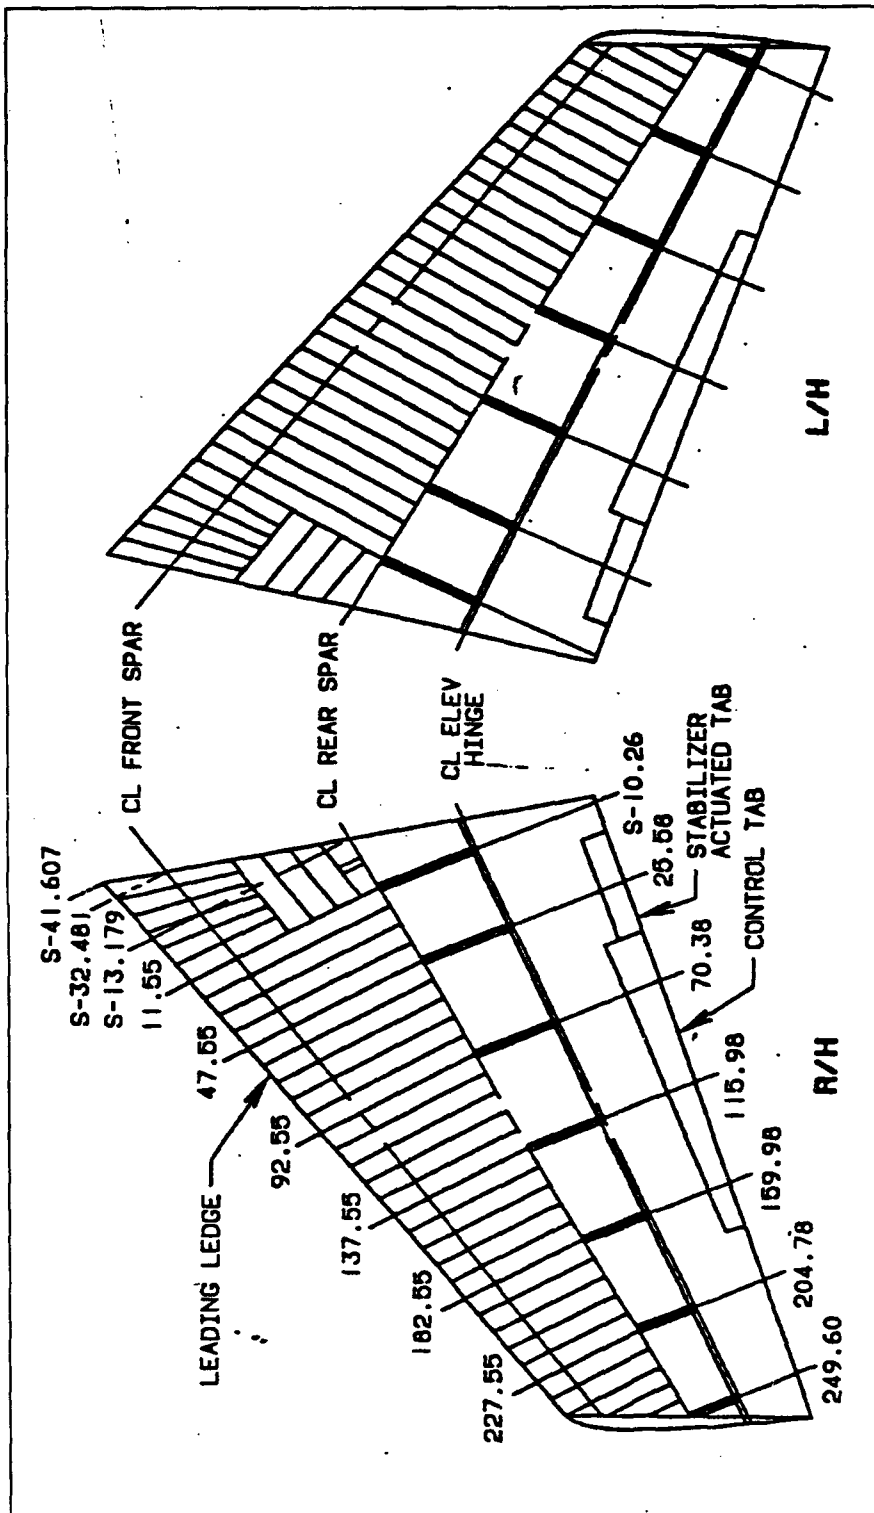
Horizontal Stabilizer And Elevator Structure, Centerline - View Looking Up
